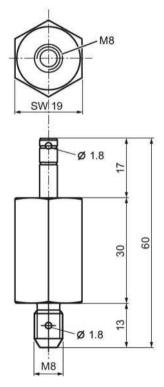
Dimension drawing of quick change holder 6GT2690-0AH00
